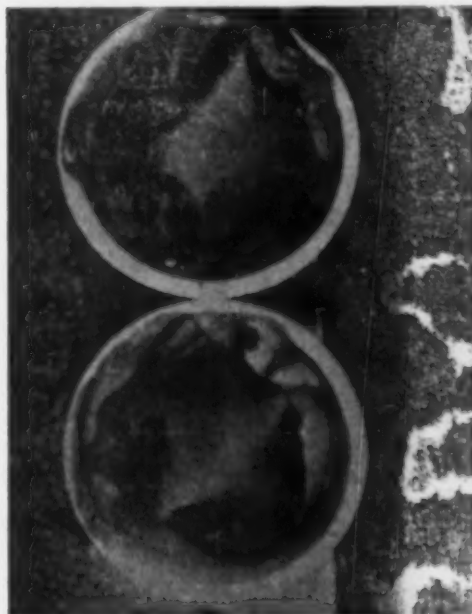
Cross-section of tube removed from Boiler No. 17, Deptford West
